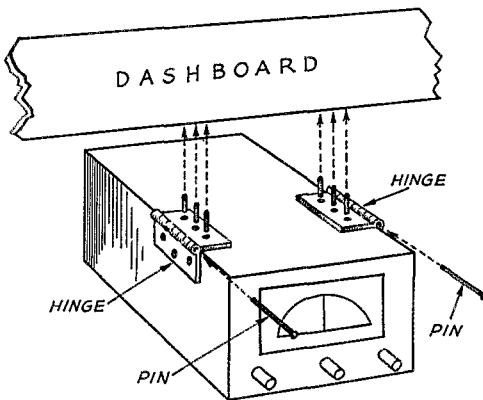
Sketch showing the hinge method of mounting mobile gear.
